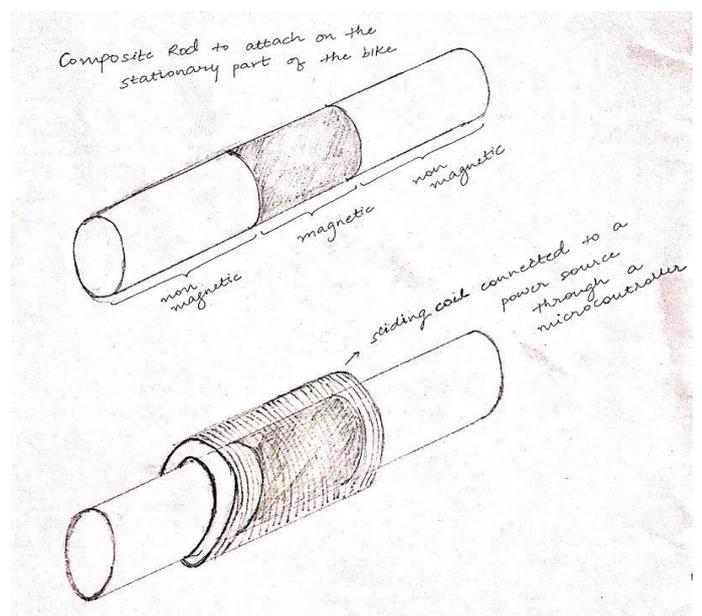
Sketch of our design of Steering Damper using the concept of solenoids
